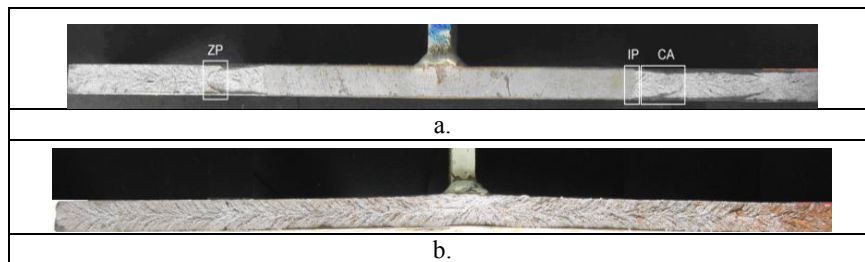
(a) Lug (pos. 68) fracture (fatigue, stable crack growth and brute fracture)
